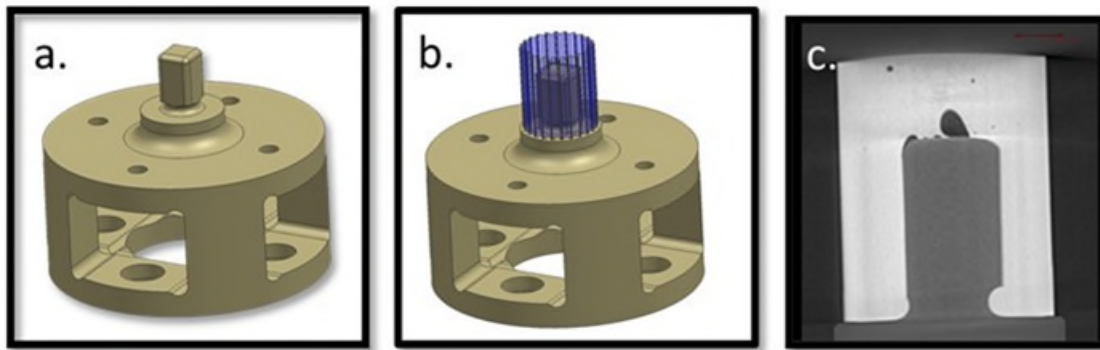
(a) Cartoon of a planet gear carrier showing the box shape of the overmolded pinion gear retention stub constraining rotational movement and the undercut constraining axial movement; (b) Cartoon of overmolded sun gear on machined carrier. (c) X-ray CT image of the BMG pinion gear overmolded on the retention feature of the planet gear carrier. The asymmetry in the image is due to the location from which the CT image slice was taken from the CT image volume.
